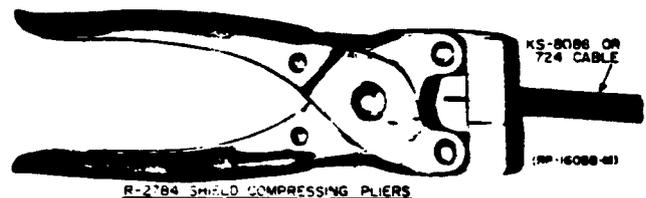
SHIELD COMPRESSING PLIERS (PAR. 4.212)
